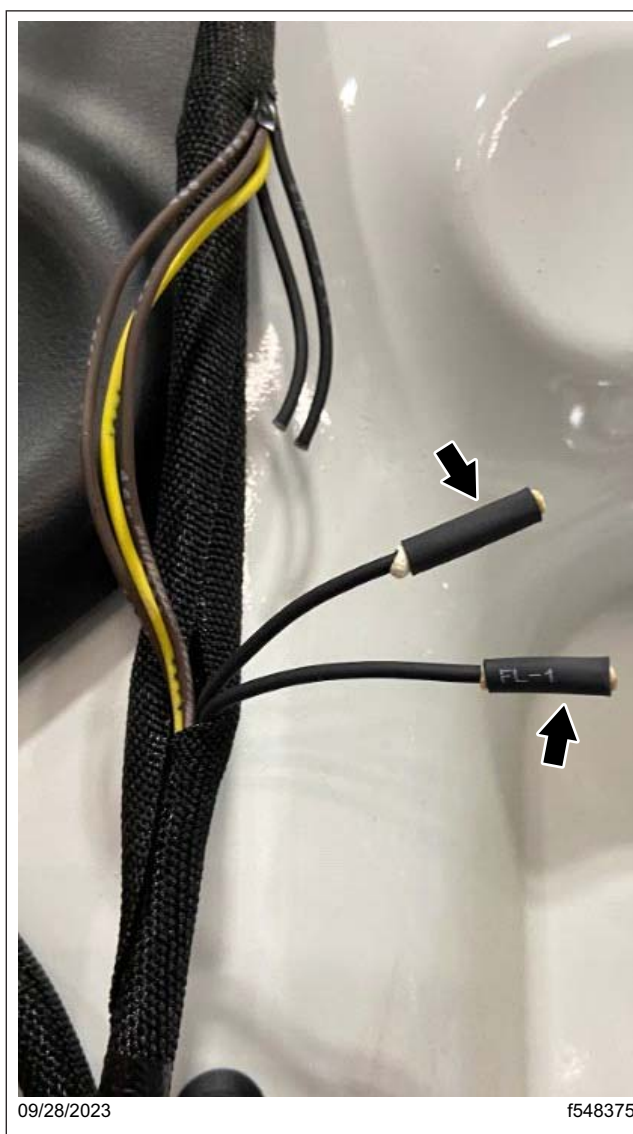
, Dead Head the Black Wire(s) that Lead Away from the Marker Light with Heat Shrink
